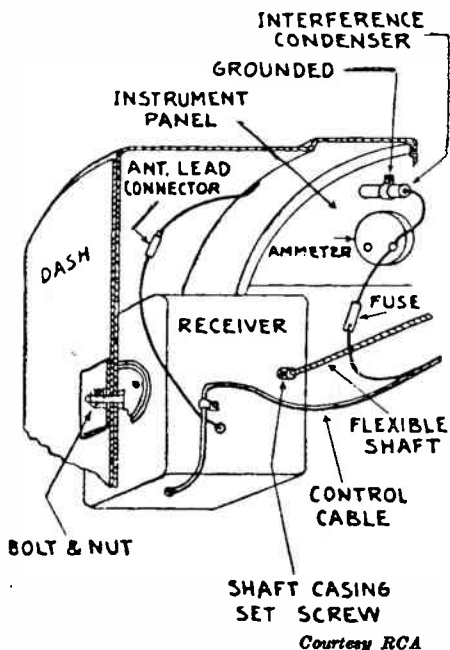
Typical mounting and connecting diagrams, such as you can expect to be with a new auto set.
